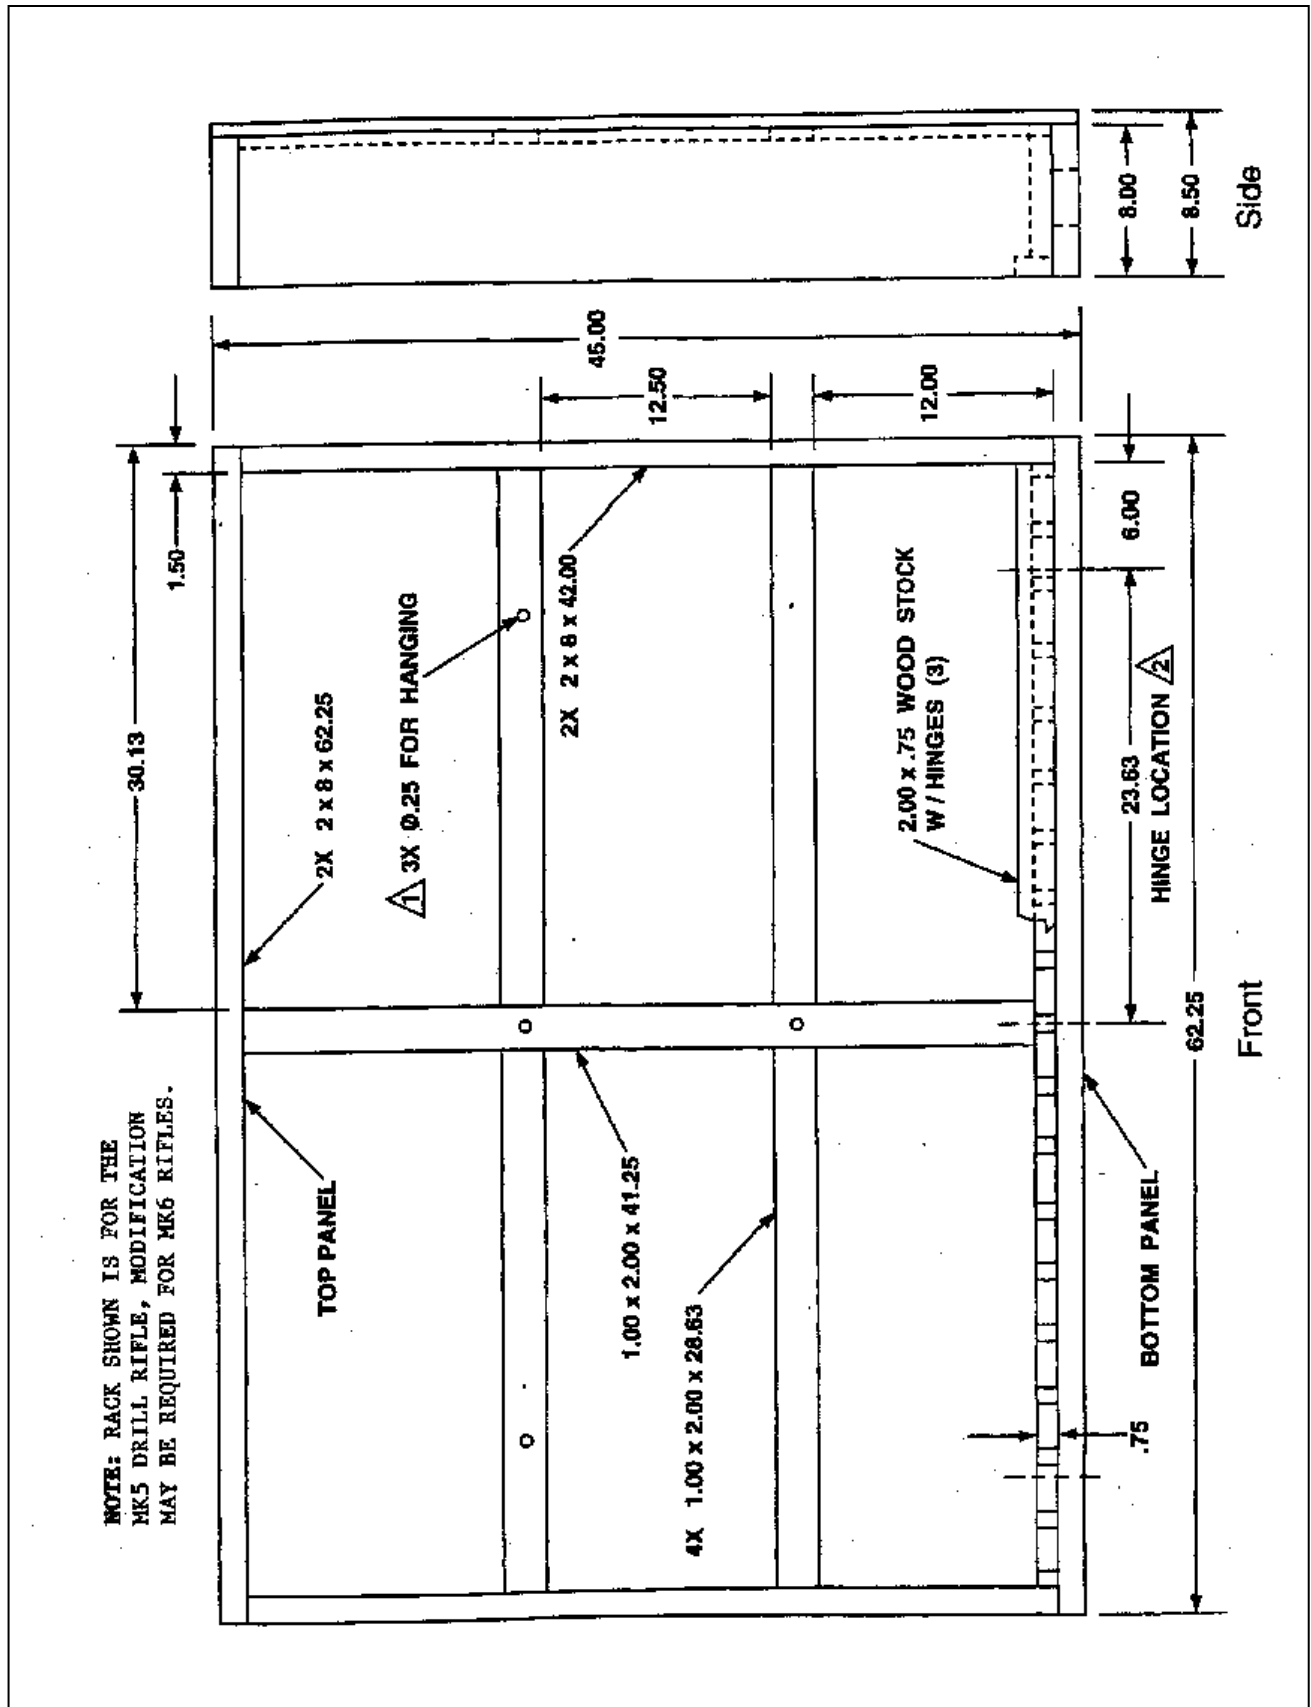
Wall Style Drill Rifle Storage Rack (Cont'd)
